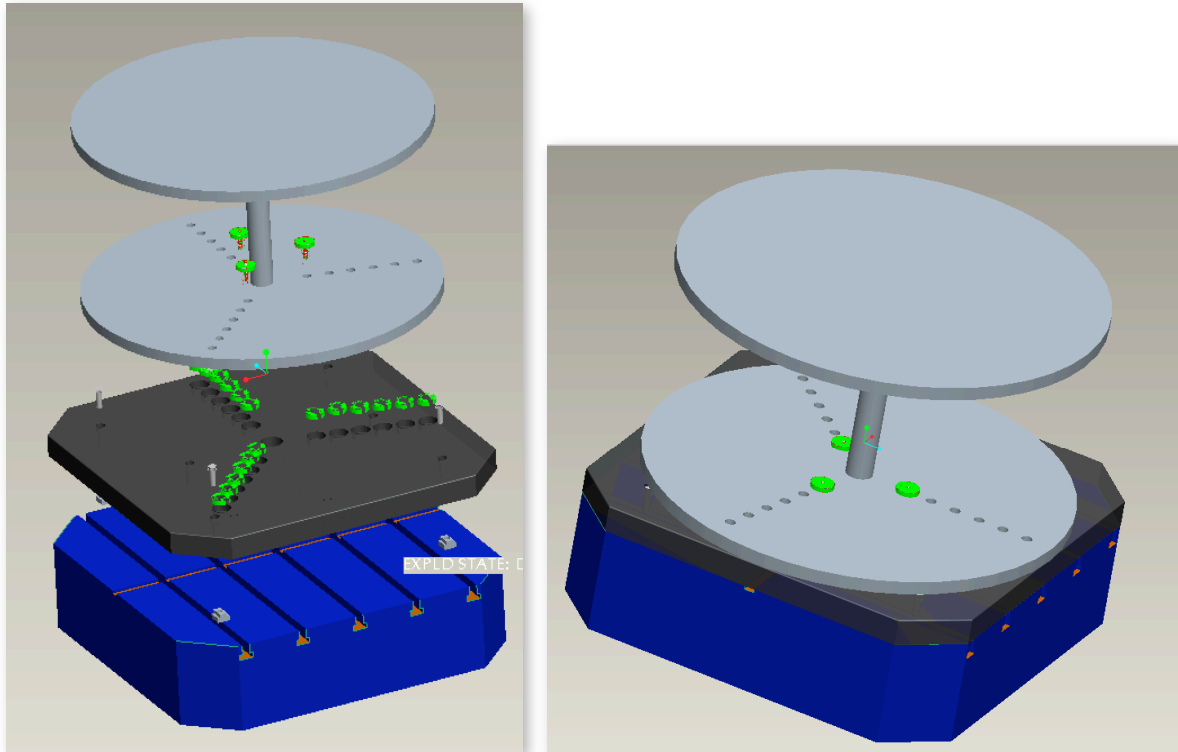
Fixturing System Mock-Up Exploded and Assembled View
